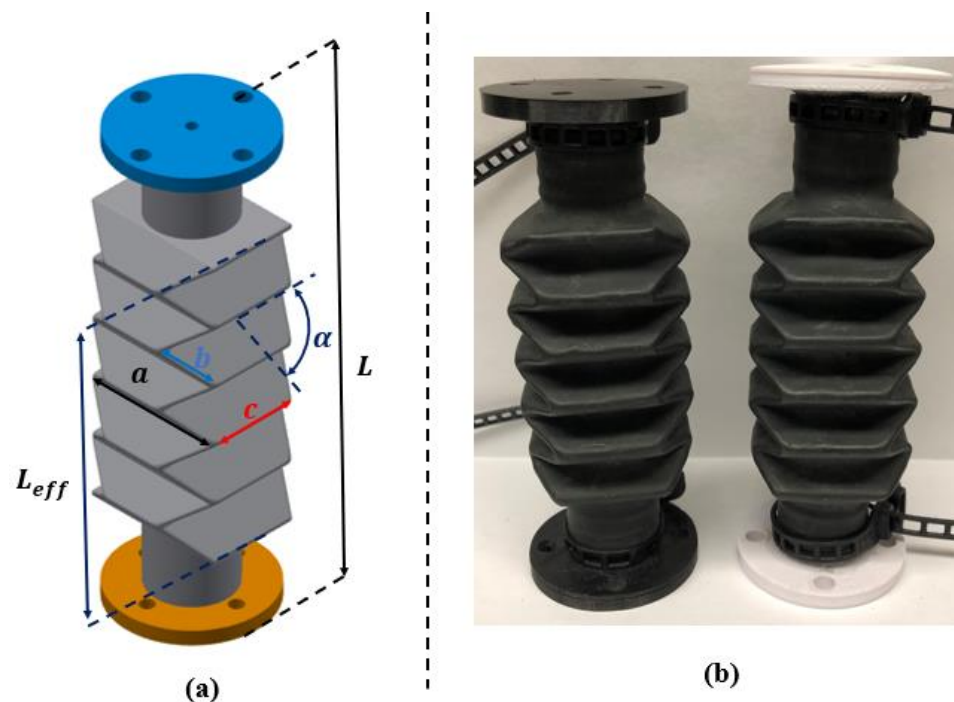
The accordion pattern OSPA used for testing. (a) Isometric view. (b) Two fabricated prototypes.
